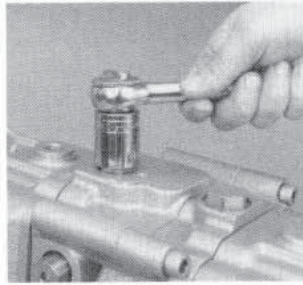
Remove Check and Relief Valve Plug (PT)
